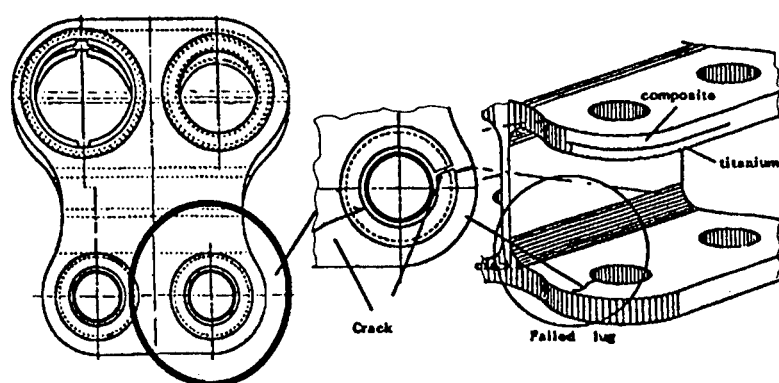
M.R. Outboard Tension Link fatigue crack of the titanium lug
